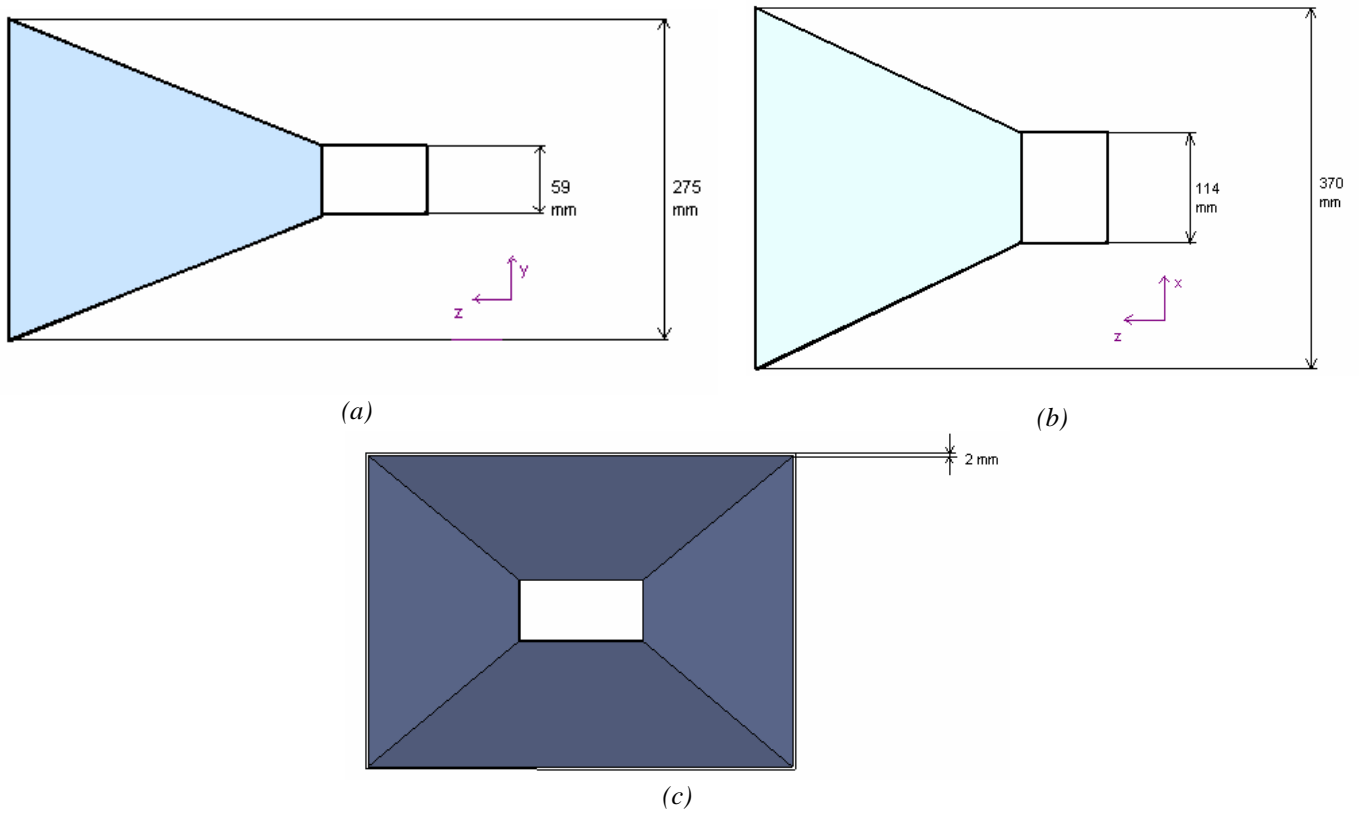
(a) View on z-y plane; (b) View on z-x plane; (c) View on x-y plane.
